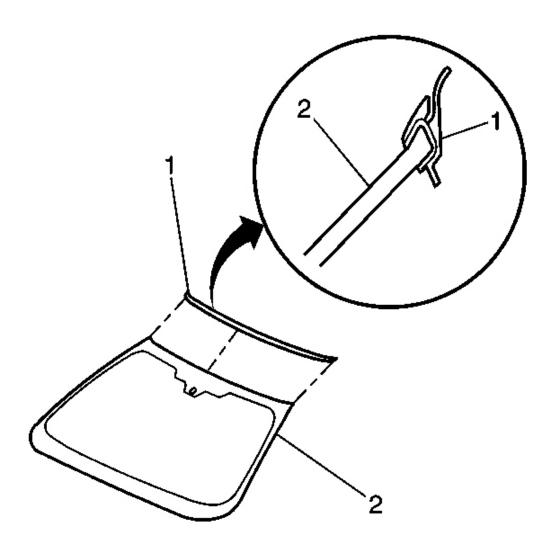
View Of Window Side Reveal Molding Courtesy of GENERAL MOTORS CORP.
